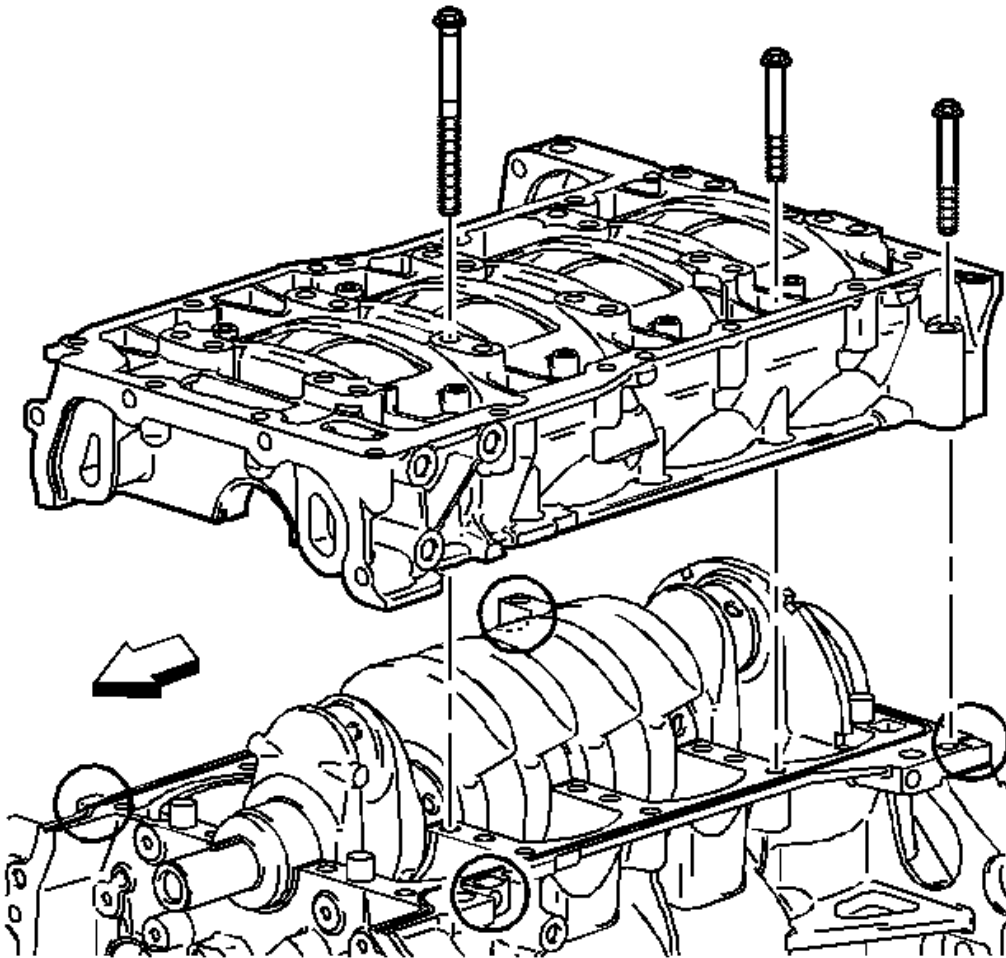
View Of Upper & Lower Crankcase W/Bolts
